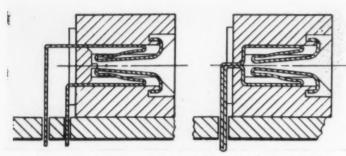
Details of dual (left) and single (right) printed circuit connectors for right-angle mounting. Other variations feature vertical mountings and connections to top of board surface. (Drawings courtesy DeJur-Amsco Corp.)
